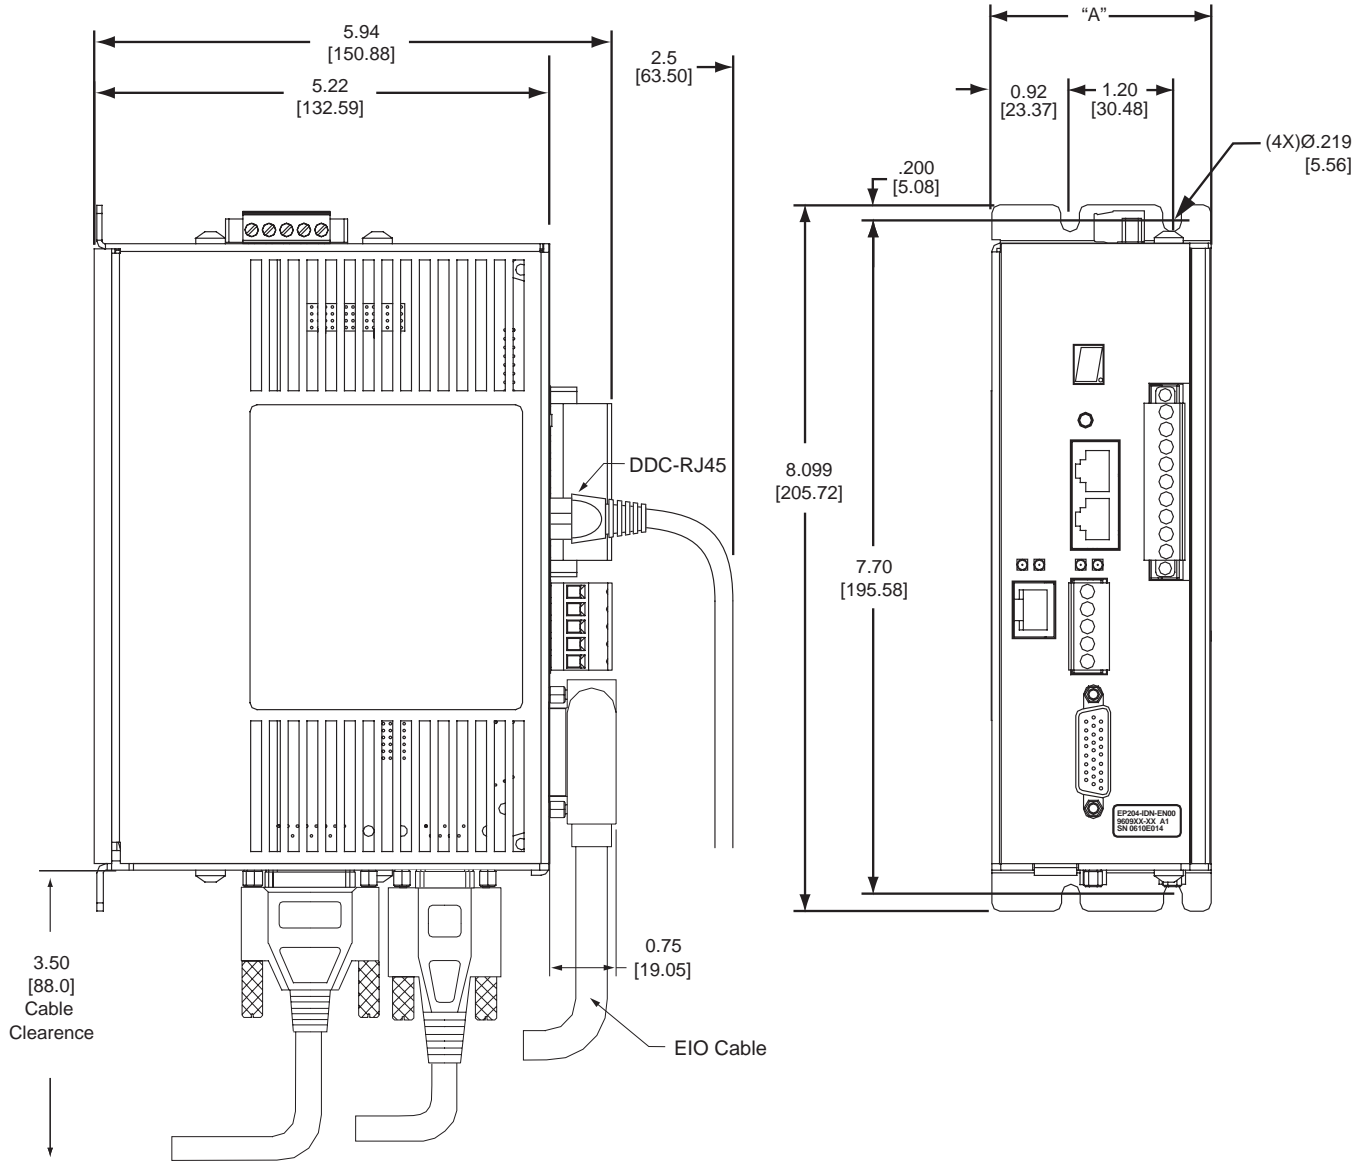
Epsilon EP-P Drive Dimensions and Clearances
